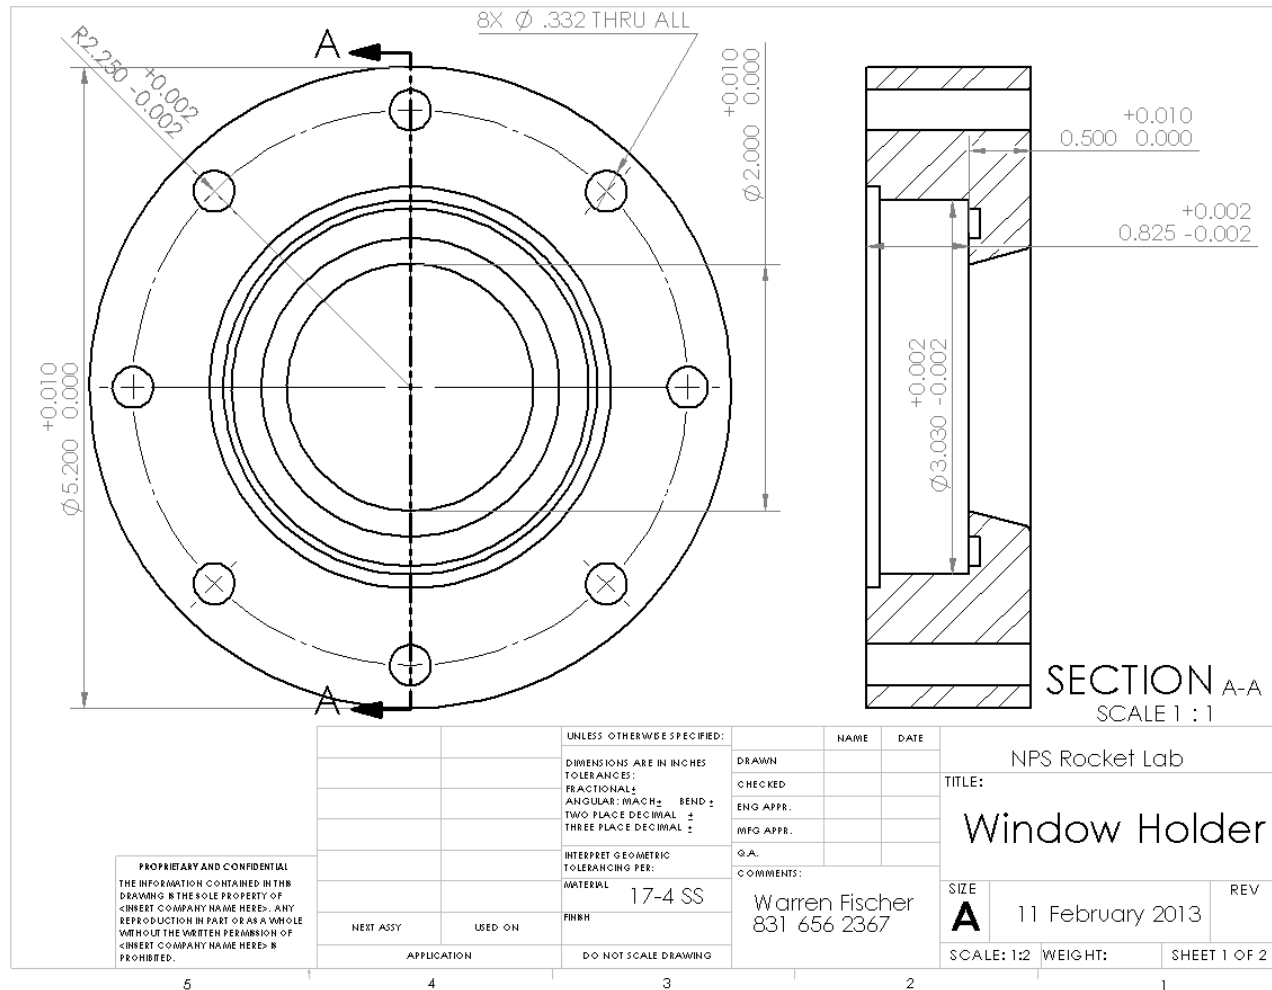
Optical Window Frame Fabrication Drawing (View 1 of 2)
